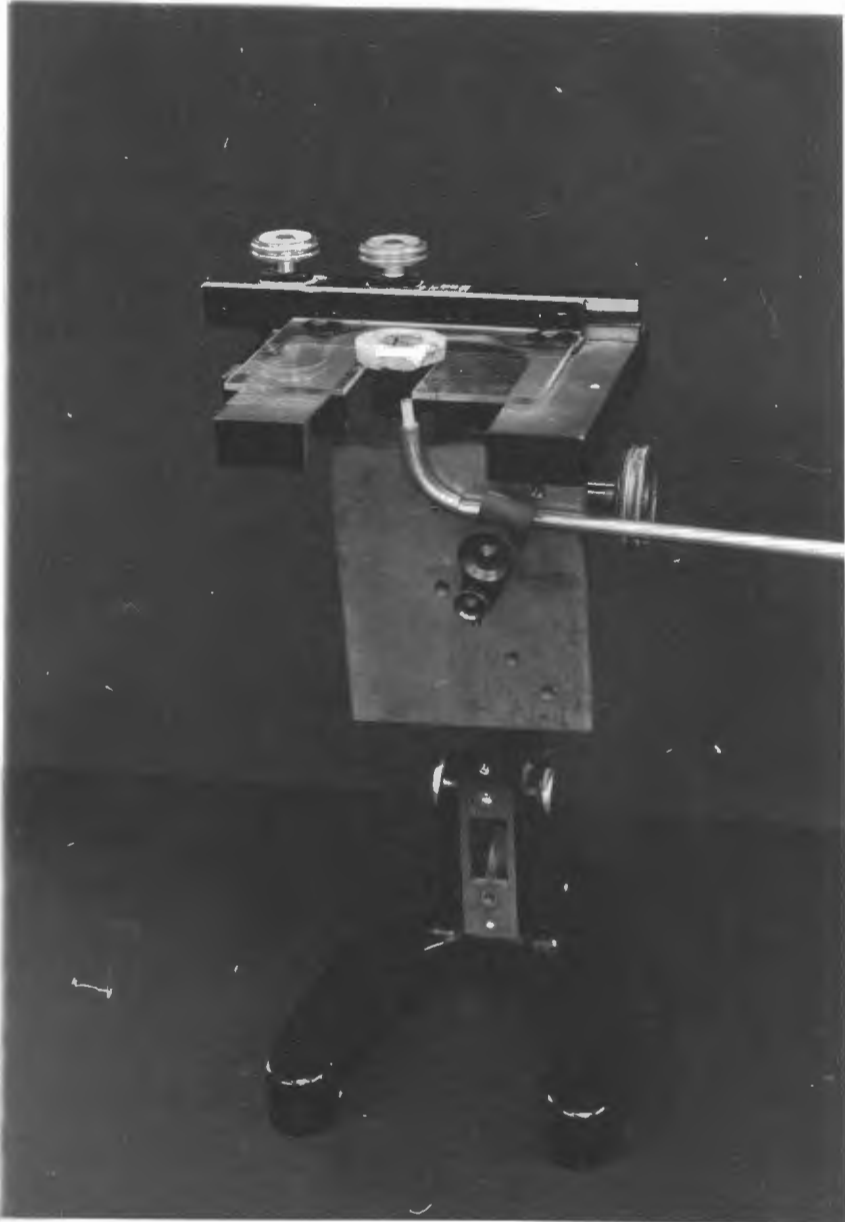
JIG FOR MAKING HOT-WIRE PROBES
